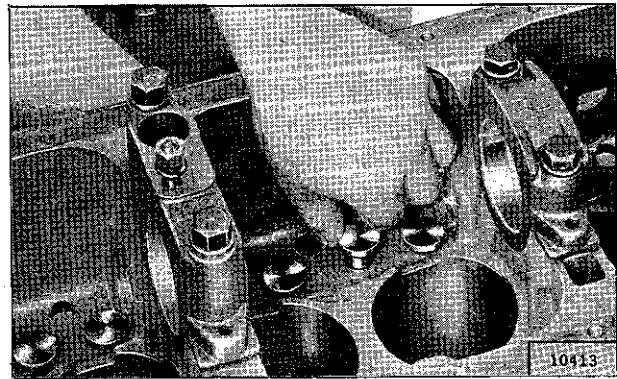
REMOVING VALVE TAPPET FROM CYLINDER BLOCK
